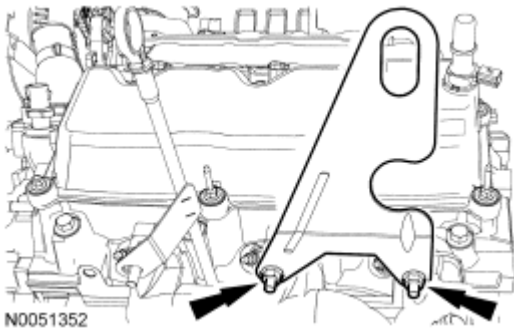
Locating LH Engine Lifting Eye & Nuts
